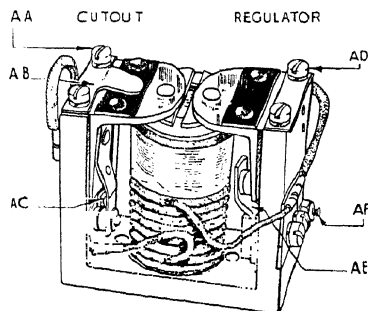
“BG” REGULATOR AND CUT-OUT
